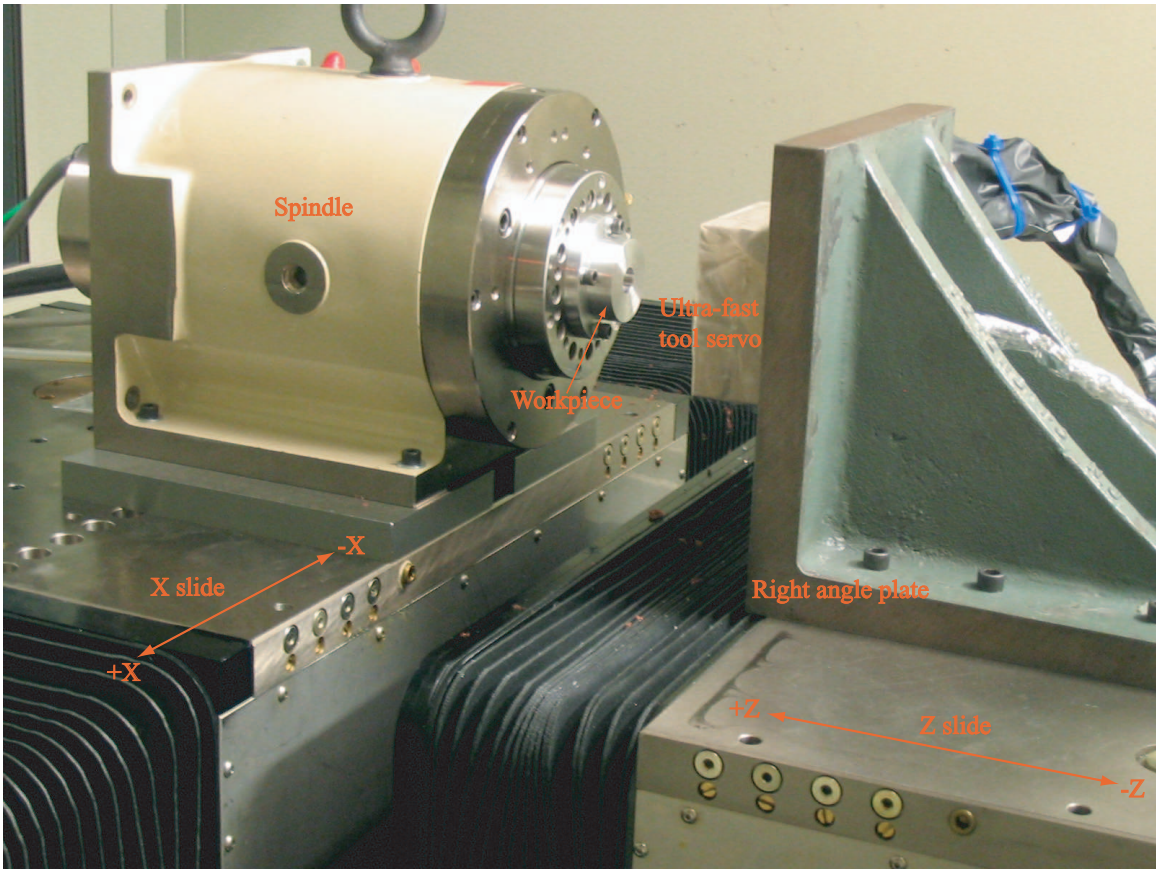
Diamond turning machine with the SM2-based UFTS installed. The front side of the UFTS is covered by a piece of latex rubber to prevent cutting fluid from entering the UFTS.
